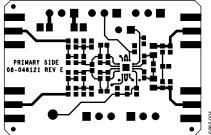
ADA4945-1CP-EBZ Evaluation Board Assembly Drawing, Primary Side
